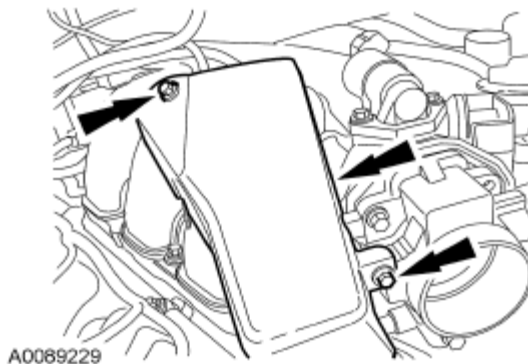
Locating Accelerator Cable Snow Shield Bolt
